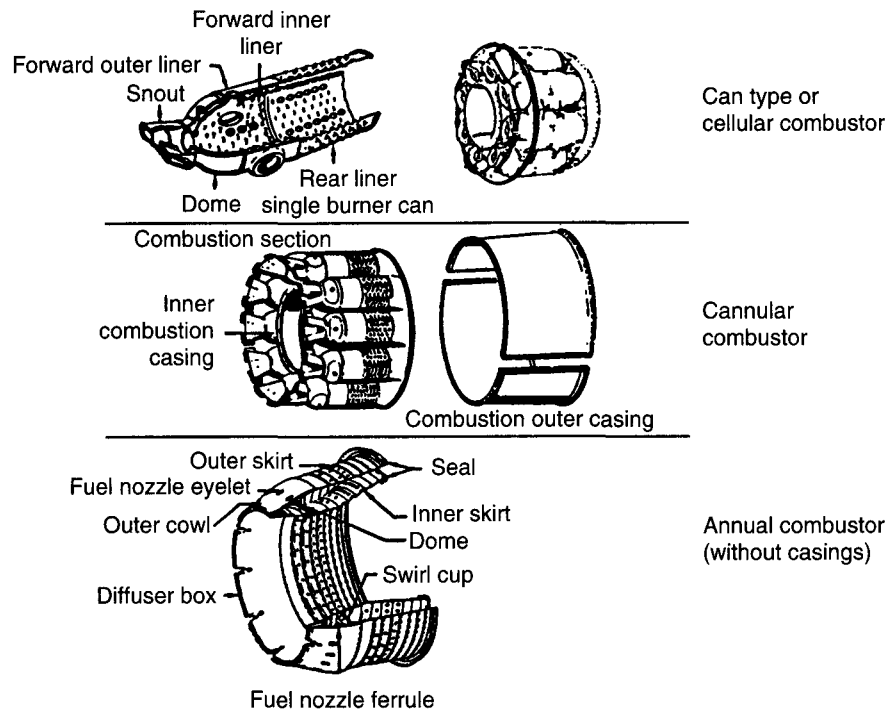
Types of combustors. Courtesy General Electric Company.
